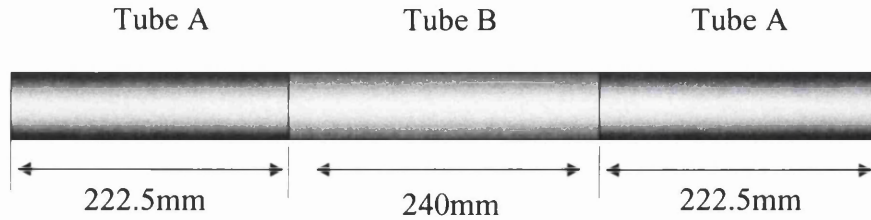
Schematic illustration of Tailored Welded Tube (TWT) configuration studied (Tube A = FeP04 70x1.2mm and Tube B = Stainless Steel 304 70x1.5mm)
